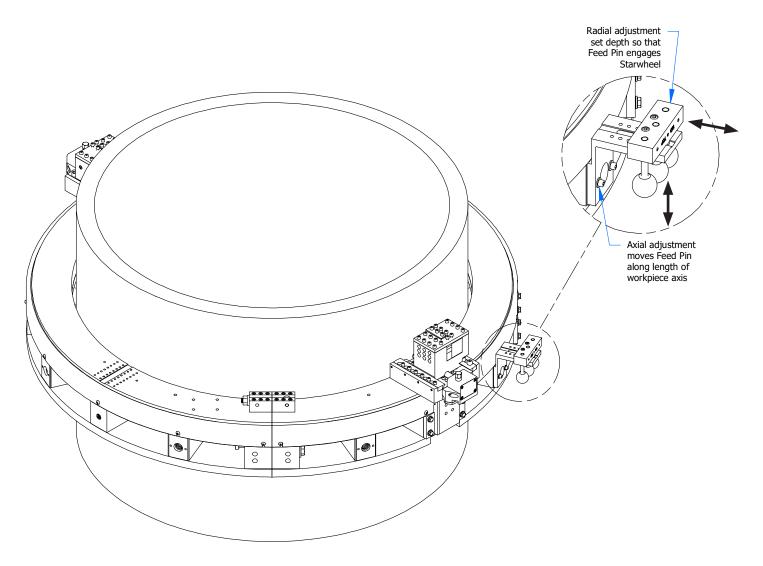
Set Feed Pin Axial and Radial Positions
